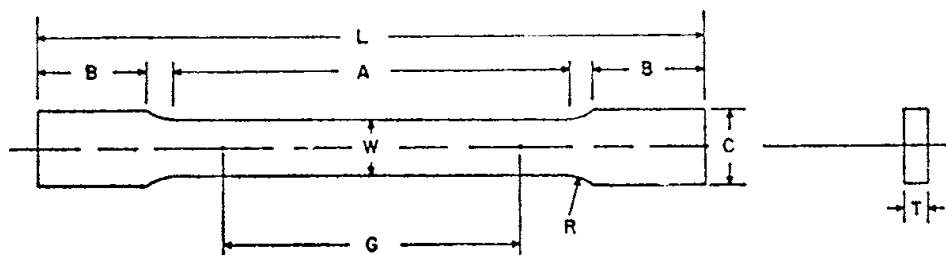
Standard sub-size tensile sample dimensions (mm) according to ASTM E8/E8M standard
